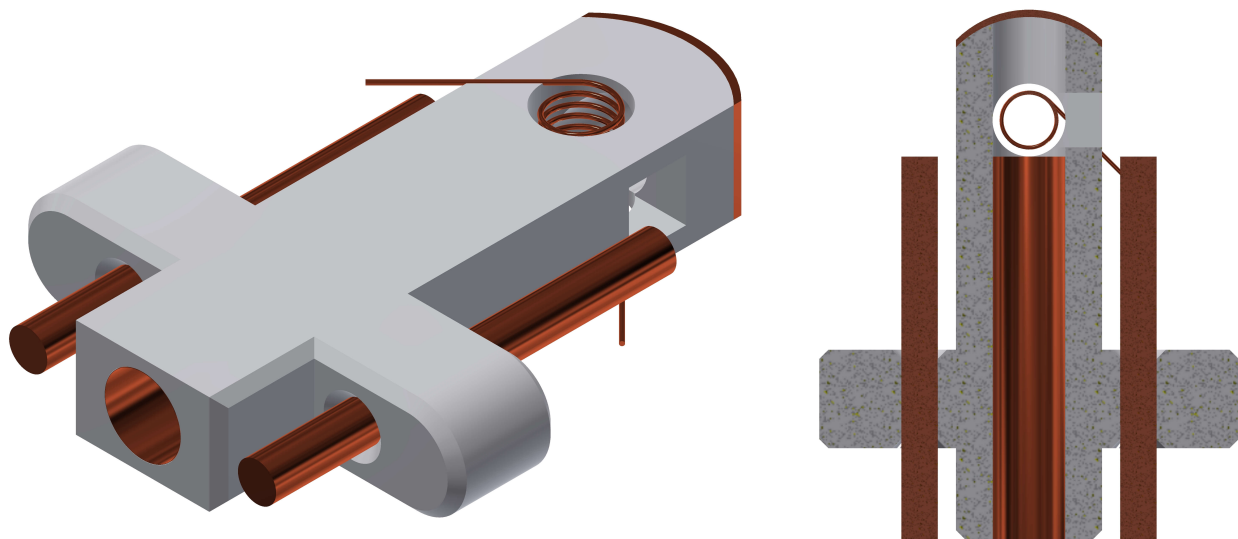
CAD drawing of 1 mm coil block assembly.
